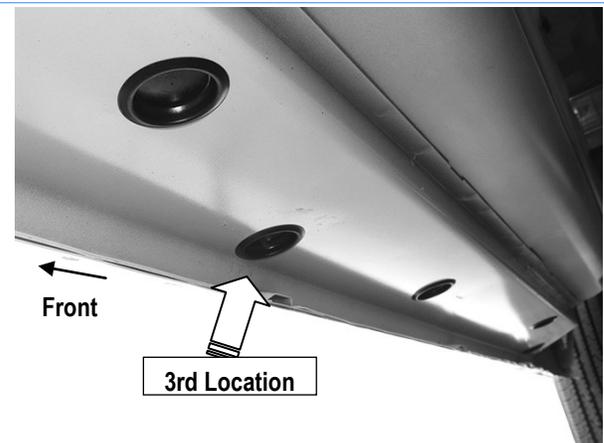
Passenger Center Mounting Bracket (PCM) Installation
